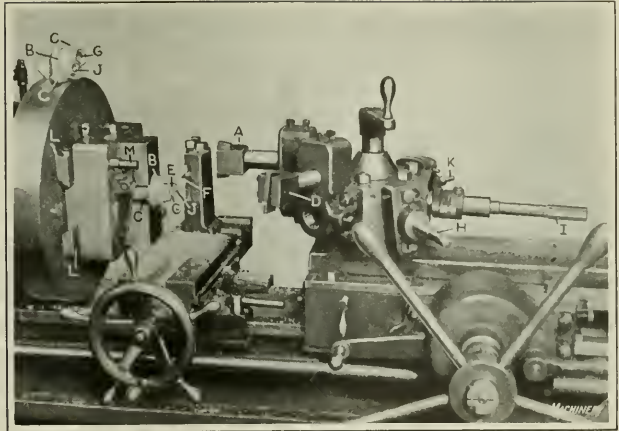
Three-station Indexing Fixture for locating Distributor Brackets for turning the Body and boring Two Eccentric Holes
